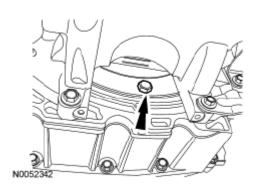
Locating Torque Converter Bolts Courtesy of FORD MOTOR CO.
